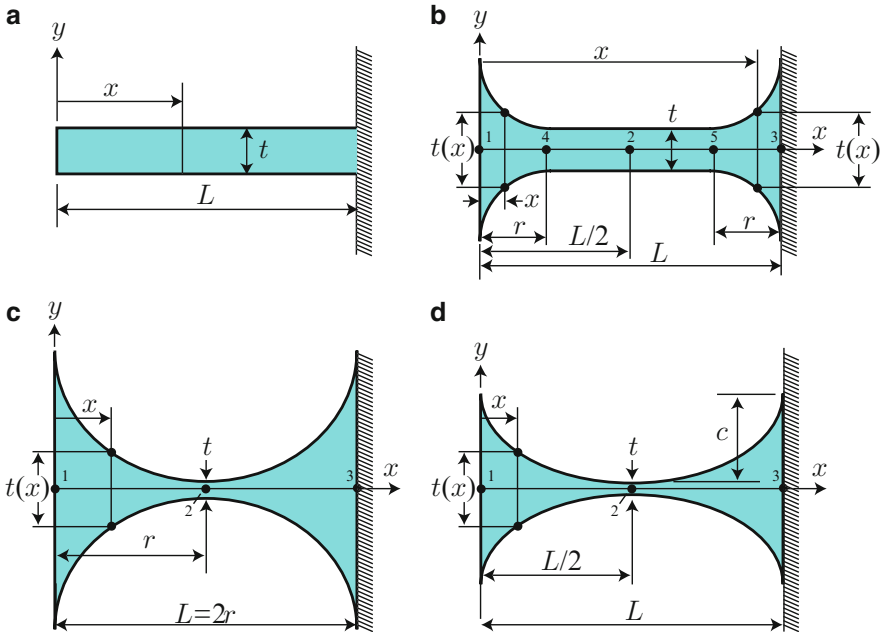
Dimensions of commonly used flexures. (a) Basic beam, (b) corner-filleted, (c) circular, and (d) ellipse
